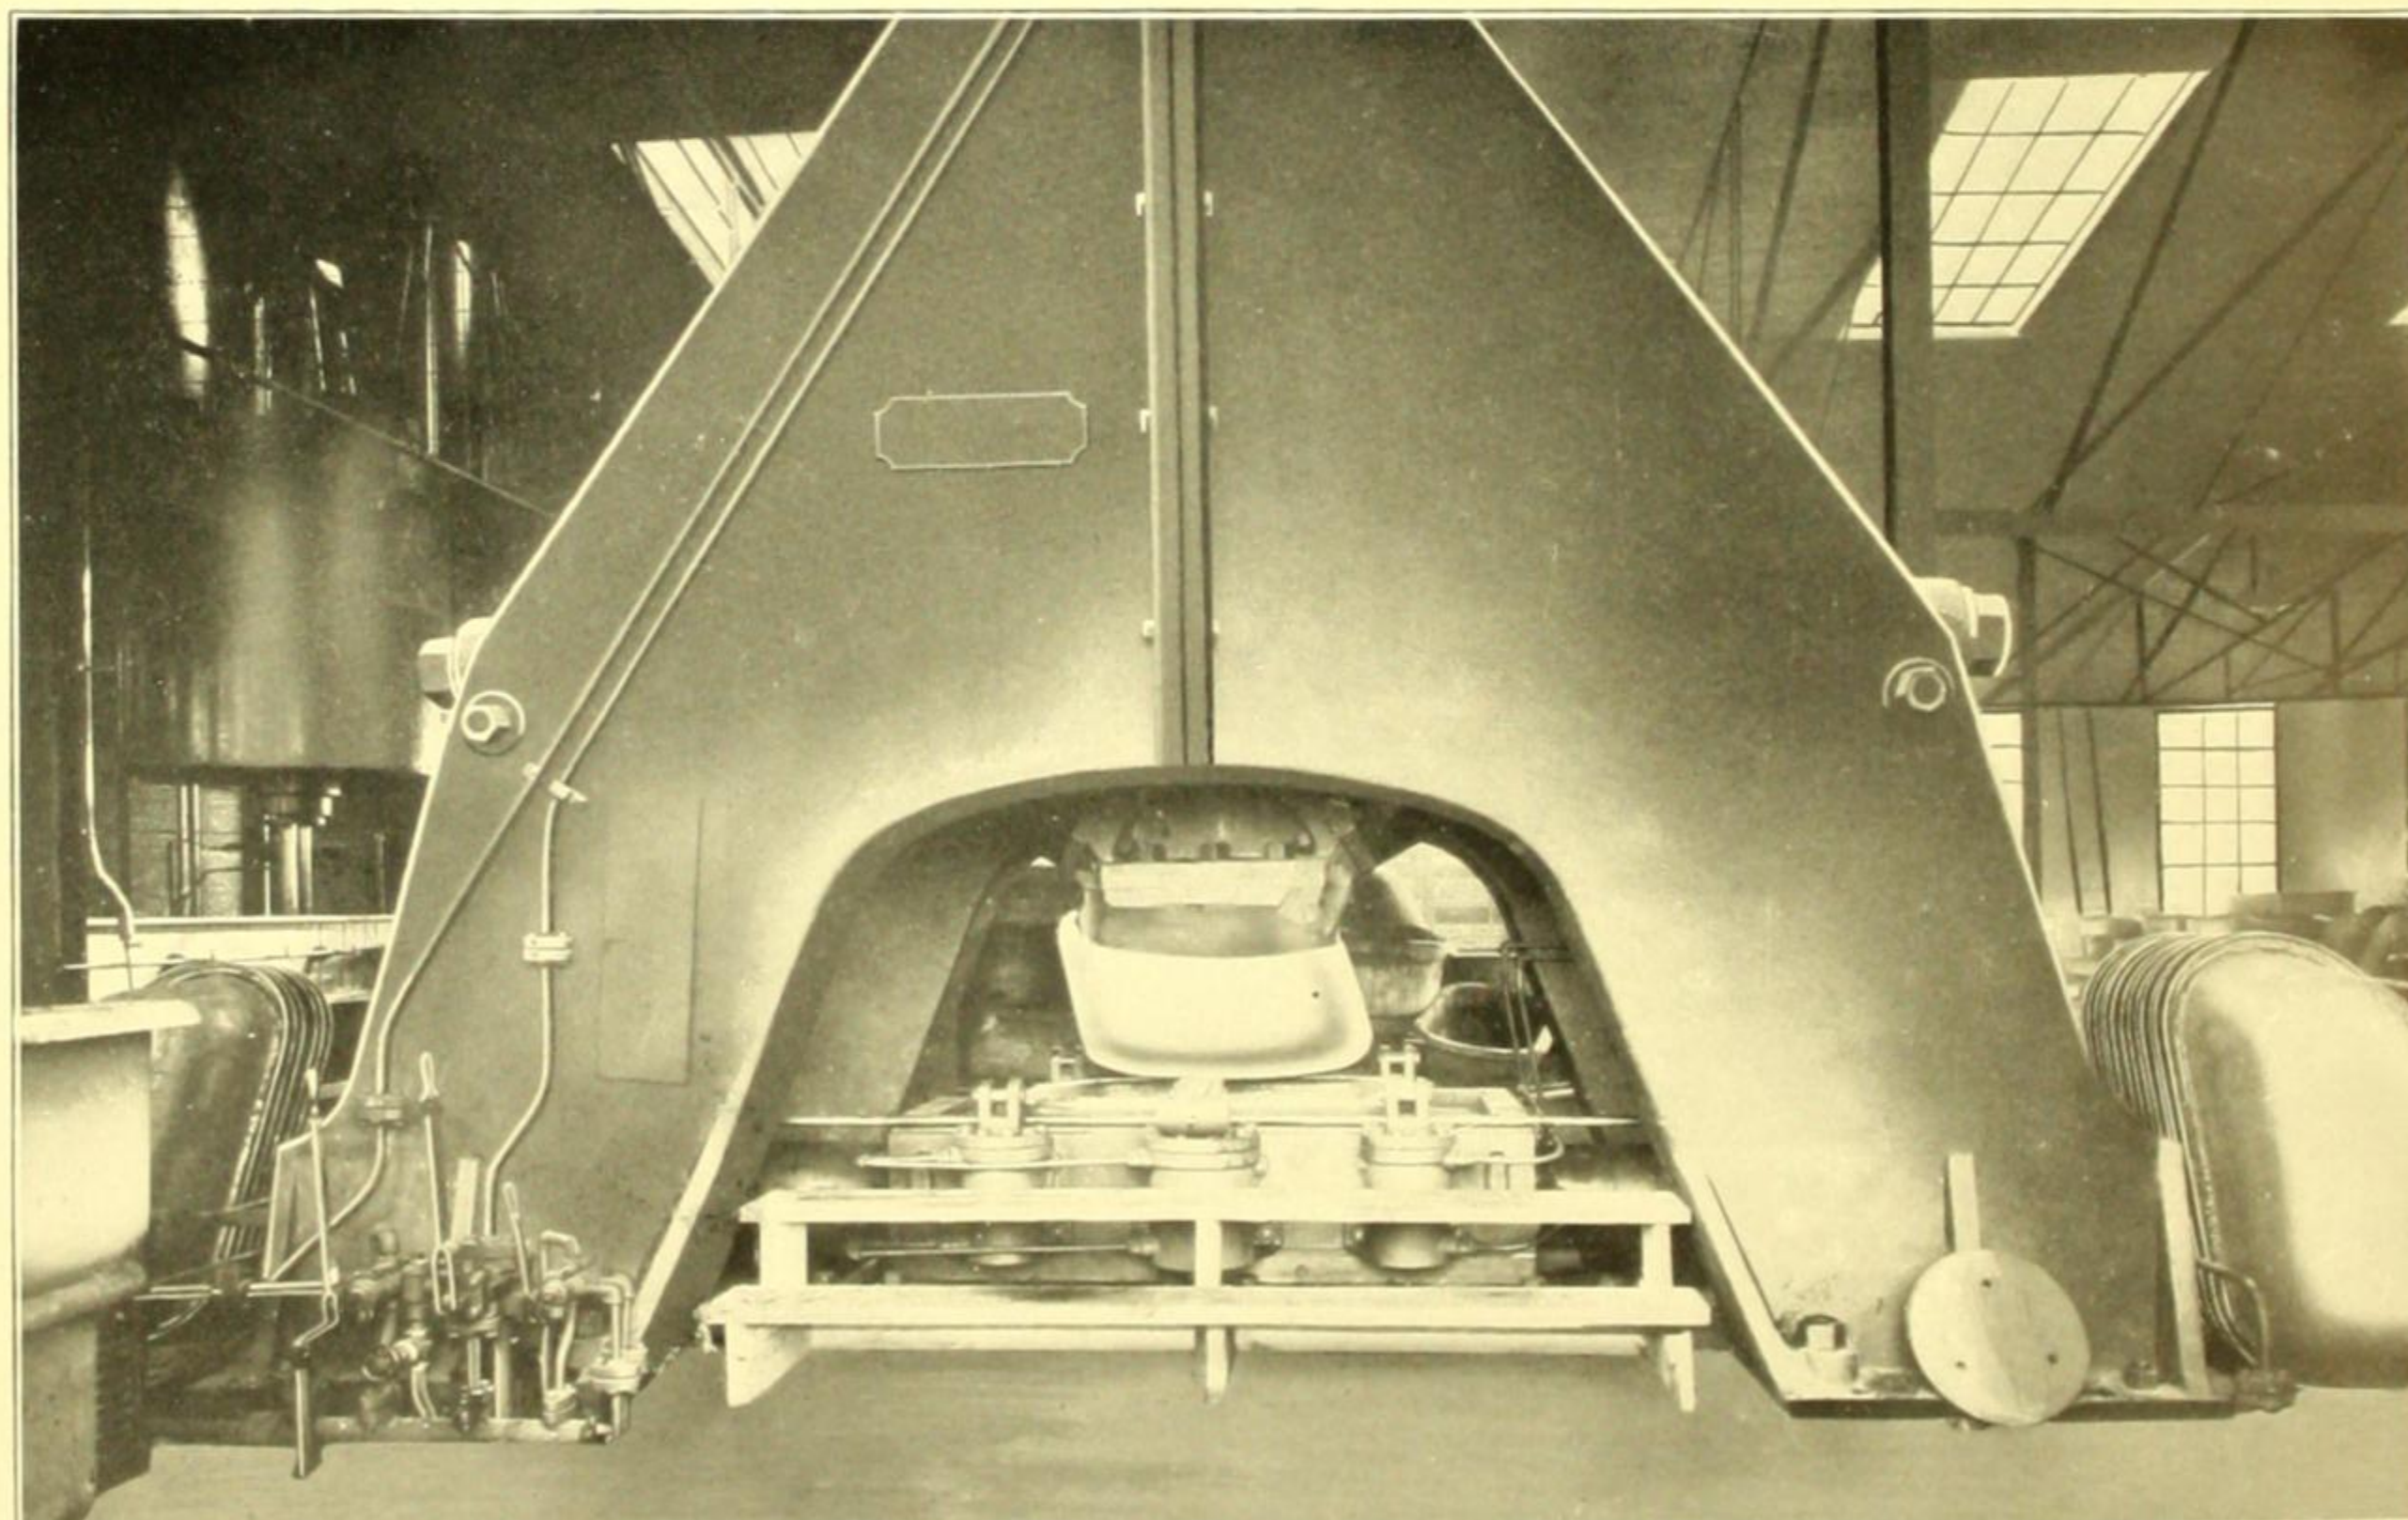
Another View of Oscillating and Reciprocating Roller Press Shown in Figure 3
